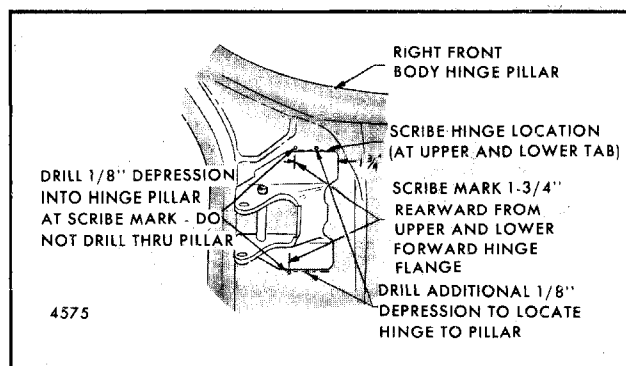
Locating Hinge Position on Body Hinge Pillar - "X" Styles
